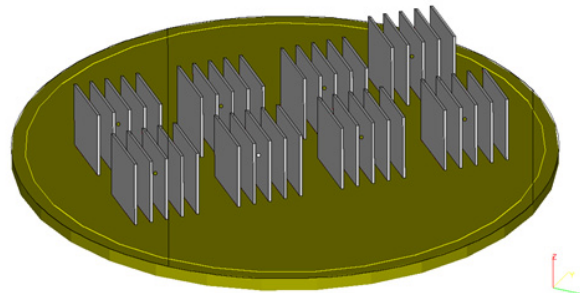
Arrangement of 5 mm long thin walls on the build platform
